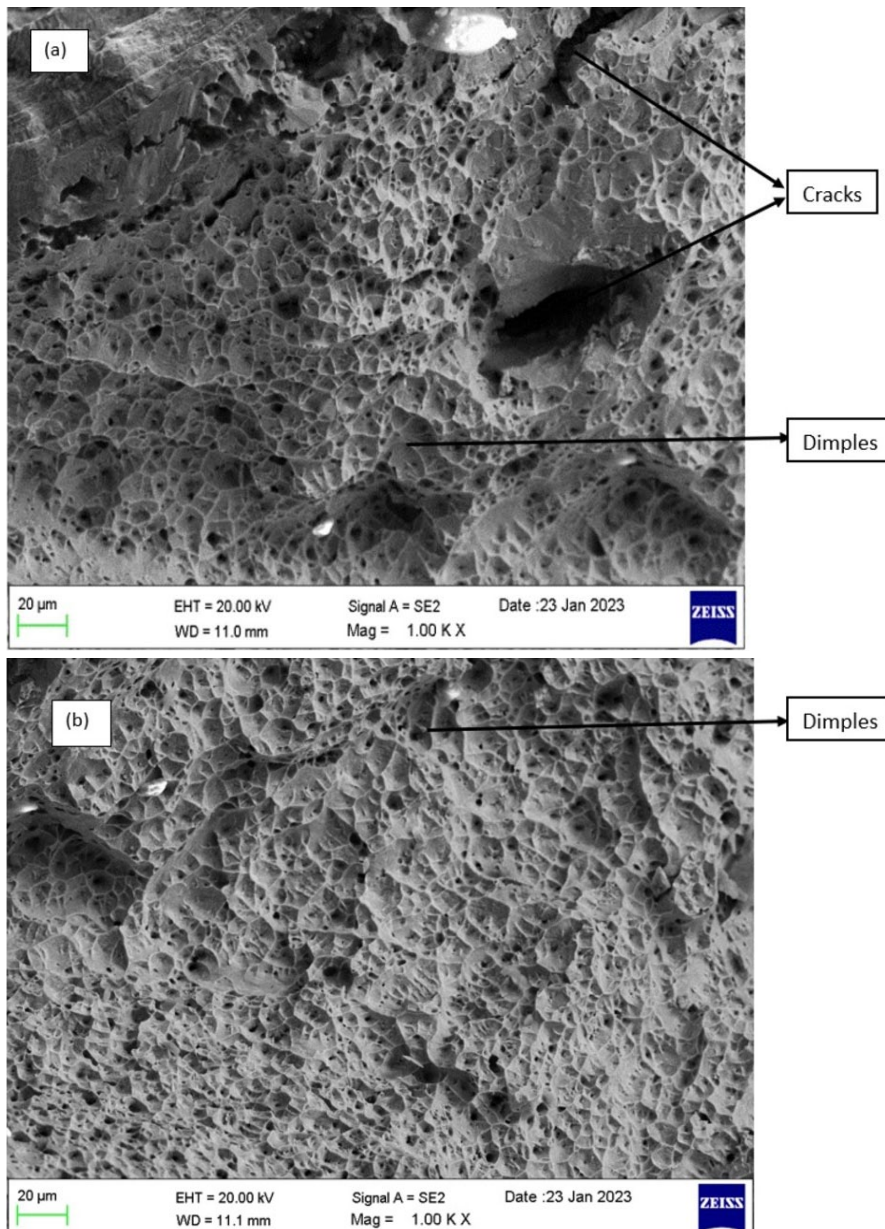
(a) Fractography of top zone (b) Fractography of bottom zone
